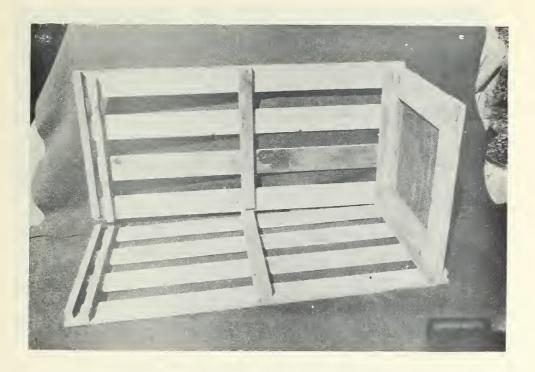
Crate partially assembled, showing method of fitting sides and ends.
